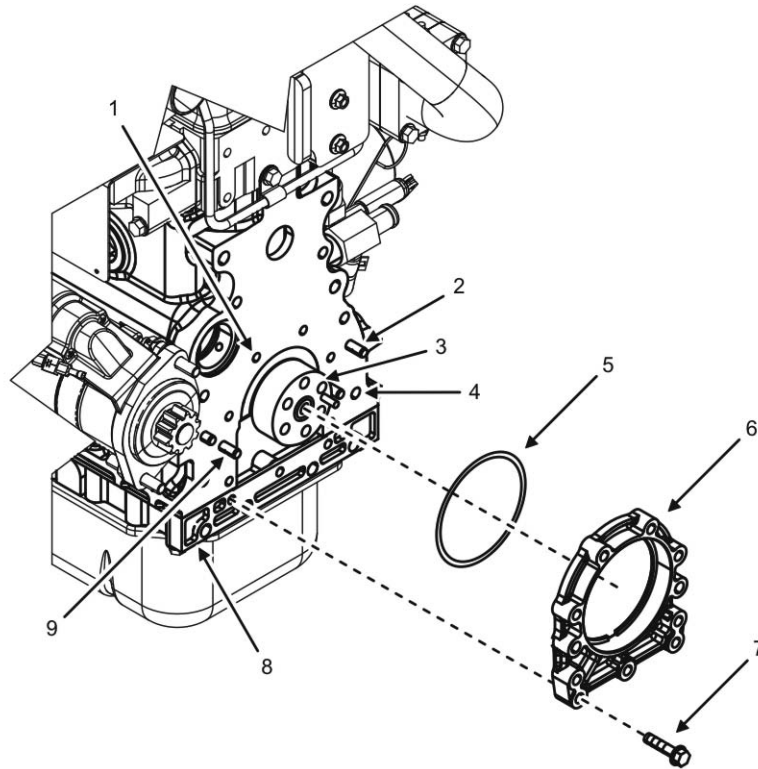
Crankcase Rear Bearing Case Cover — Removal.
